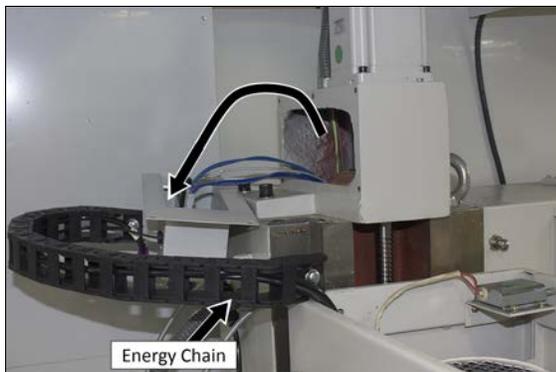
Z-axis motor mount below the Z-axis motor on the machine column.
